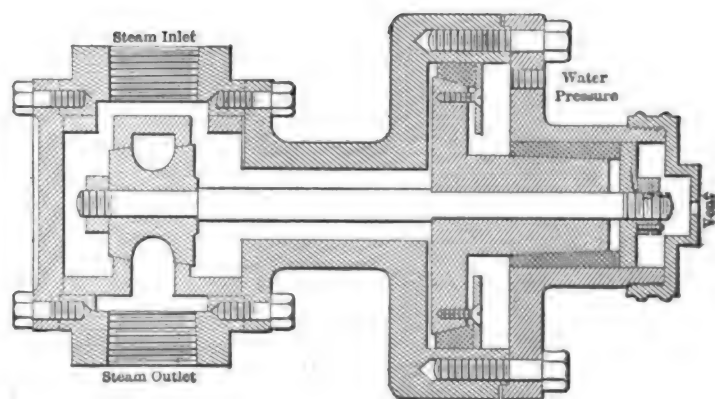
AUTOMATIC CONTROLLER FOR BOILER FEED PUMPS.
